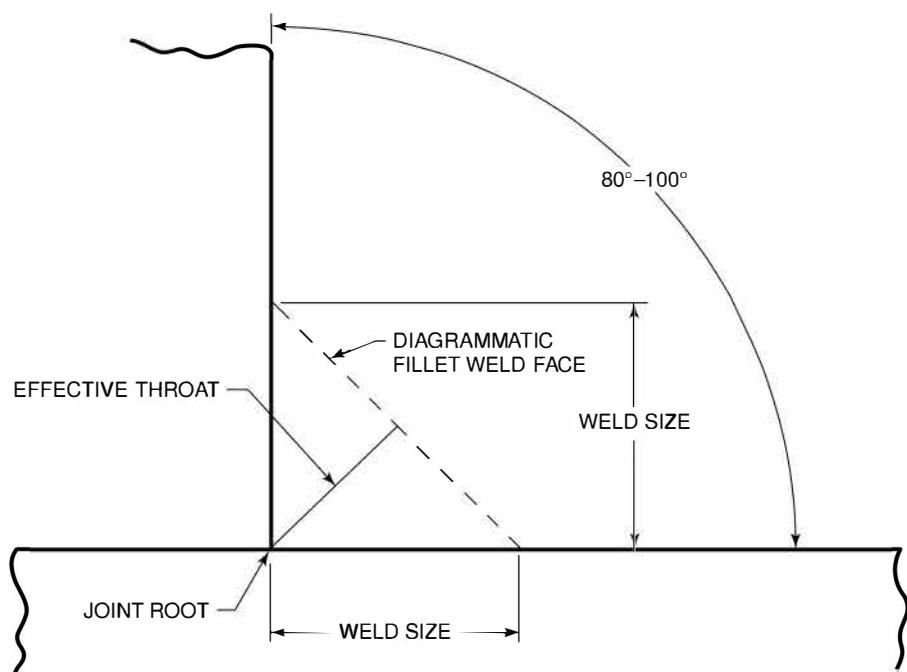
Fillet Weld (see 4.4.2.6)
